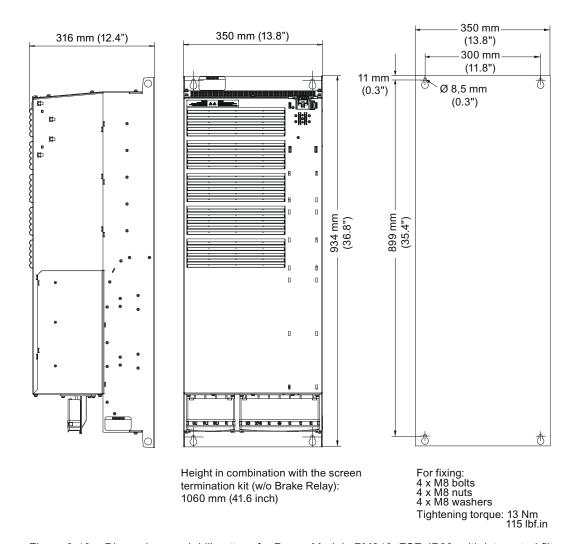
Dimensions and drill pattern for Power Module PM240, FSF, IP20, with integrated filter class a
